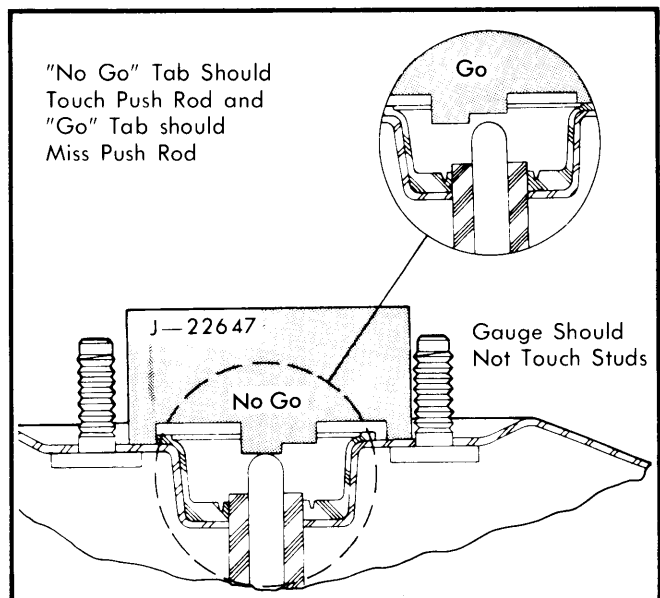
Using Push Rod "Go-No Go" Height Gauge to Measure Push Rod Height (Chevrolet Only)
